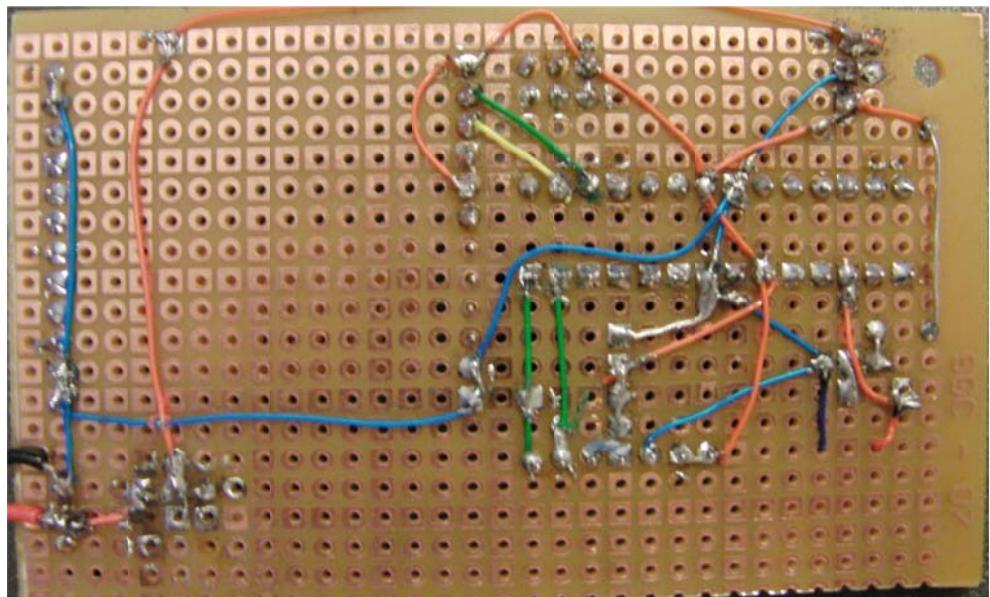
Bottom Side of the Solder Board on the Remote Tank
